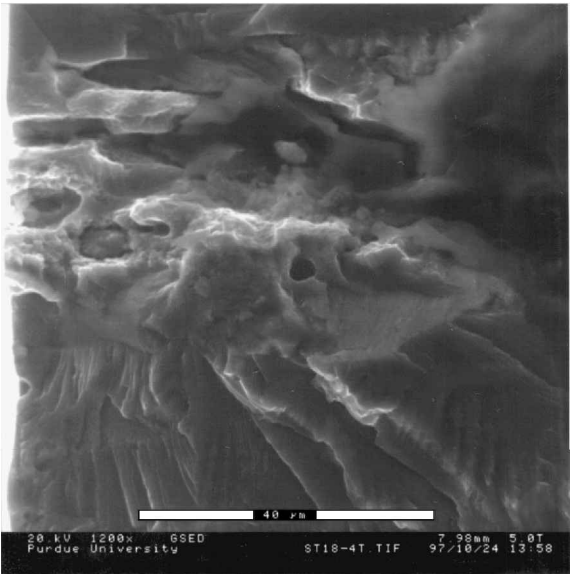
ESEM image of specimen 18 fracture surface.
